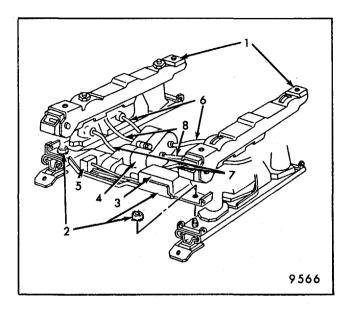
Power Six-Way Seat Adjusters - All 45-55, 50-50 and 60-40 Seats (Except Cadillac 6CB69 Style)
